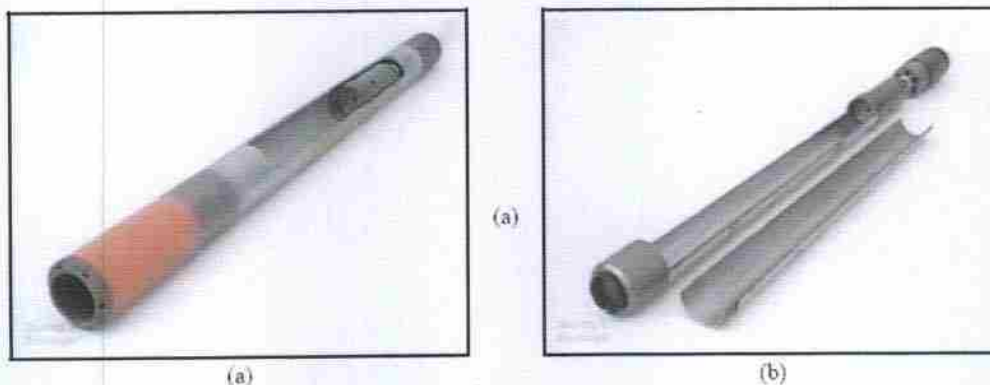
Double Tube Core Barrel. (a) Outer barrel assembly (b) Inner barrel assembly.
